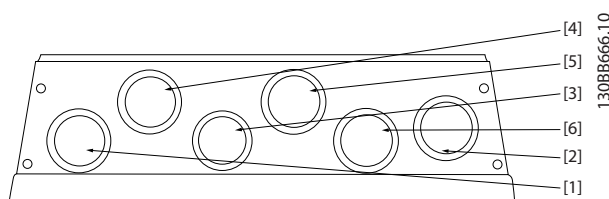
A4 - IP55 Threaded Gland Holes
